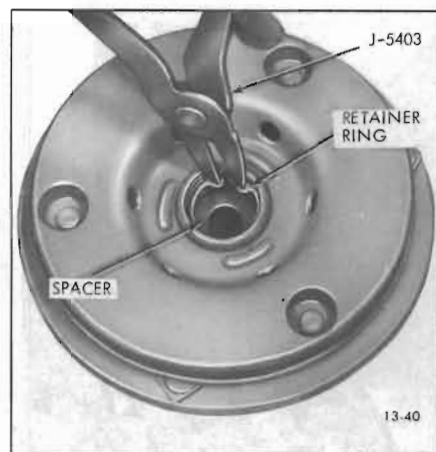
Removing or Installing Retainer Ring in Clutch Drive Plate
